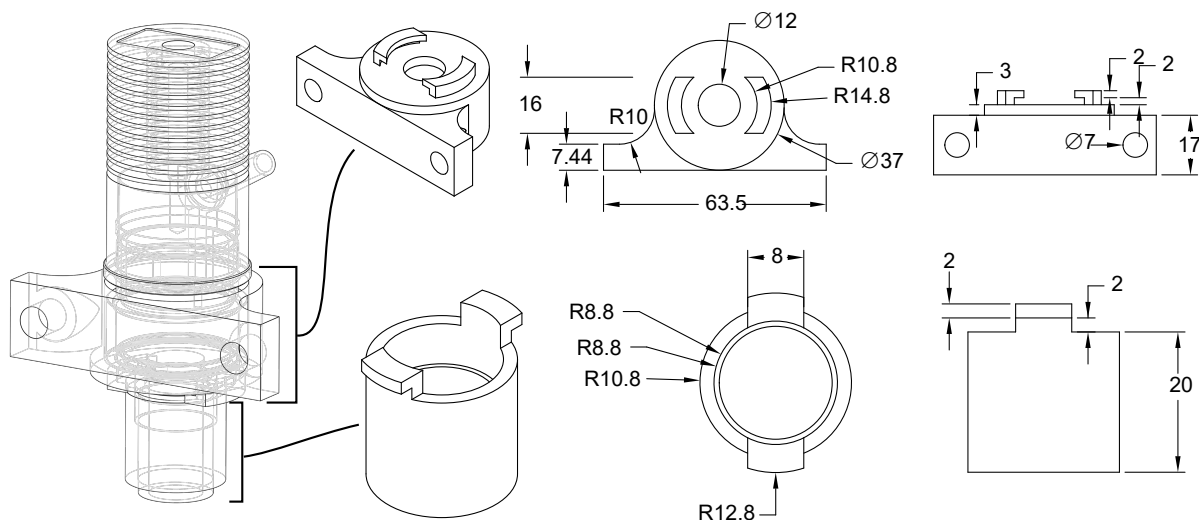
LED curing assembly. Dimensions of 3D printed adapters are shown in mm.
